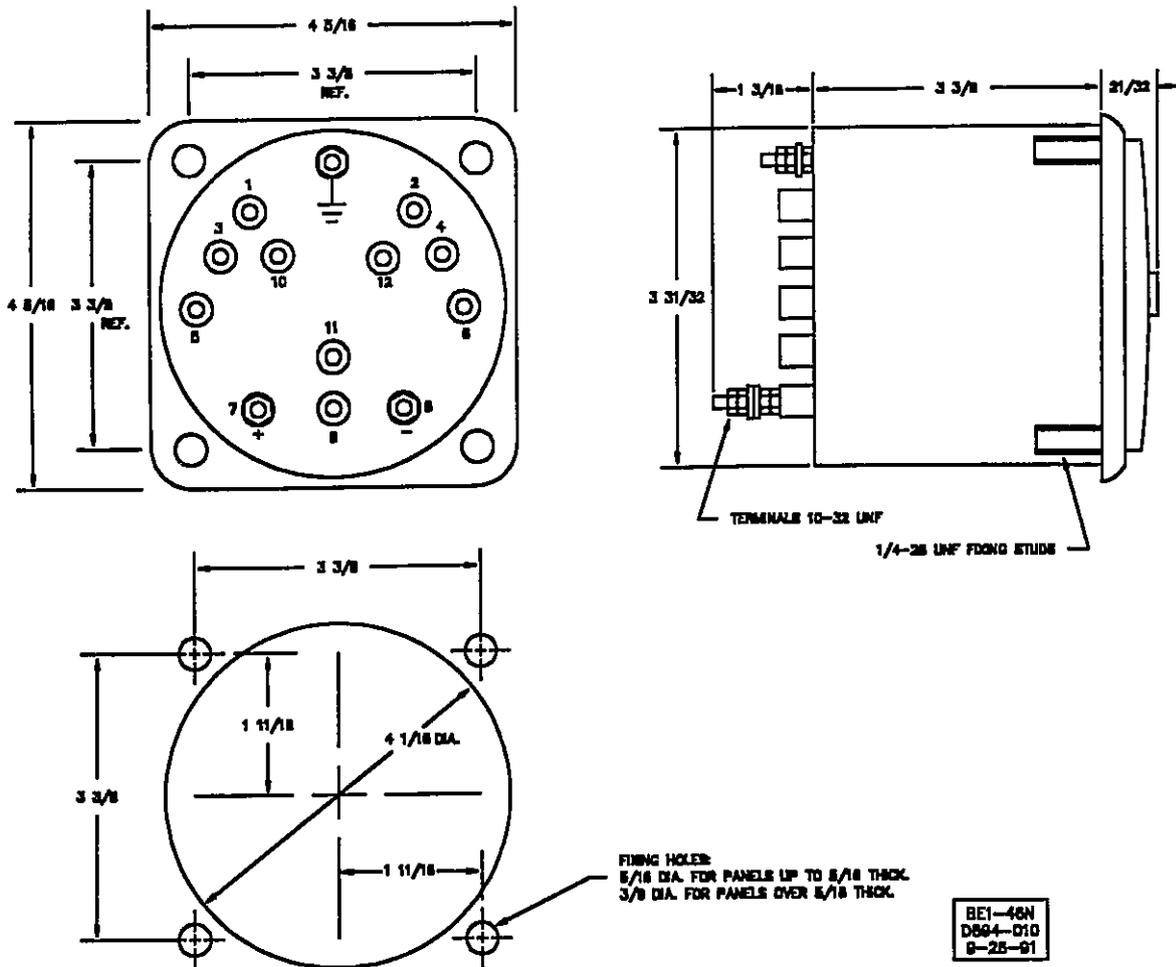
Remote Meter Dimensions and Drilling Diagram
